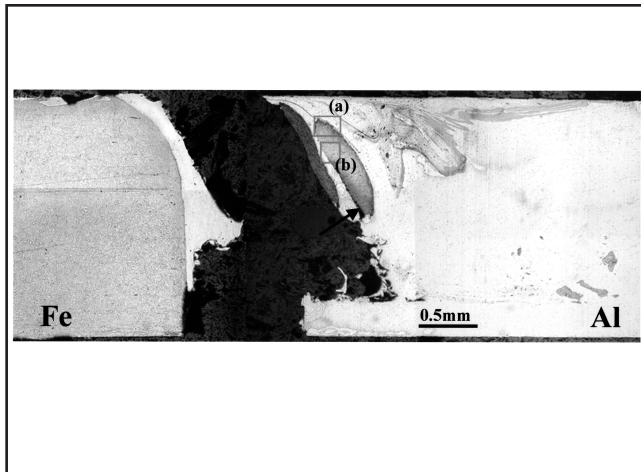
Cross-sectional view of the broken part of the joint after tension test. Fracture occurred along the interface between the steel fragment and the aluminum matrix.
